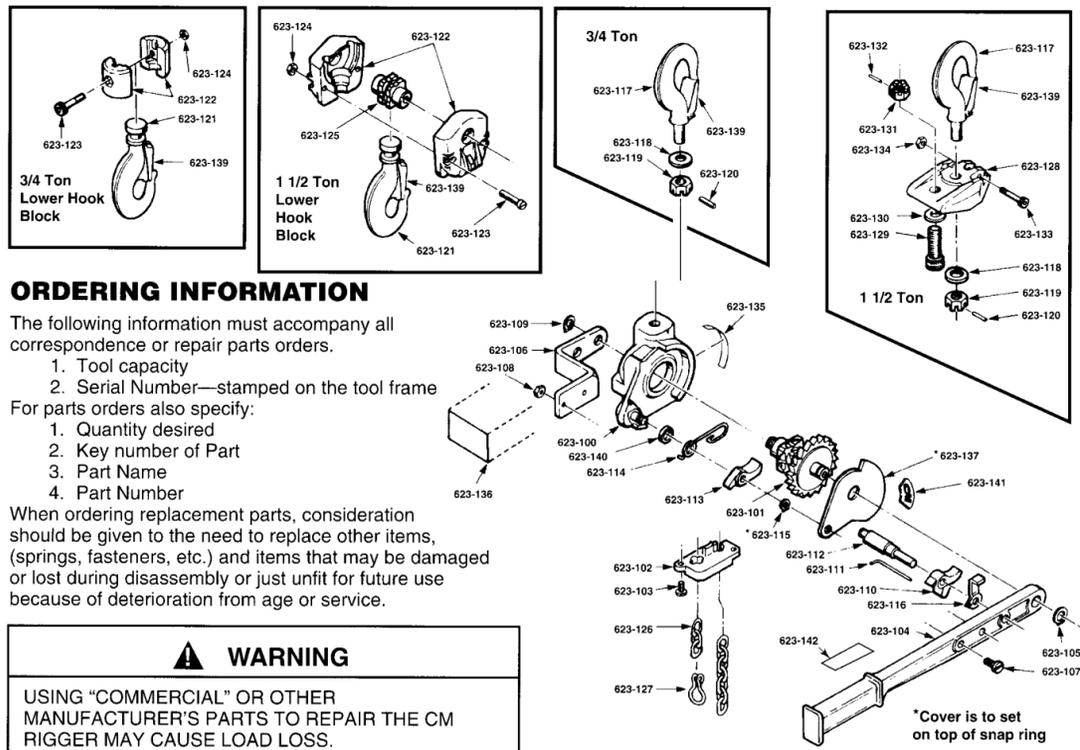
Exploded View 3/4-1 1/2 ton CM Rigger
